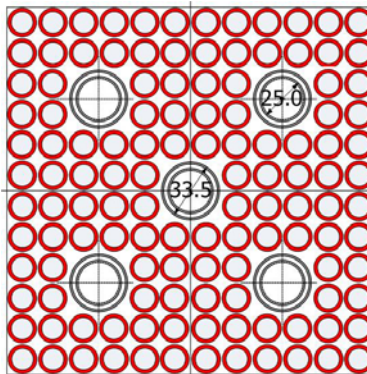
Plan view of 12X12 dual cooled fuel for OPR-1000 (dual guide tubes are illustrated)
